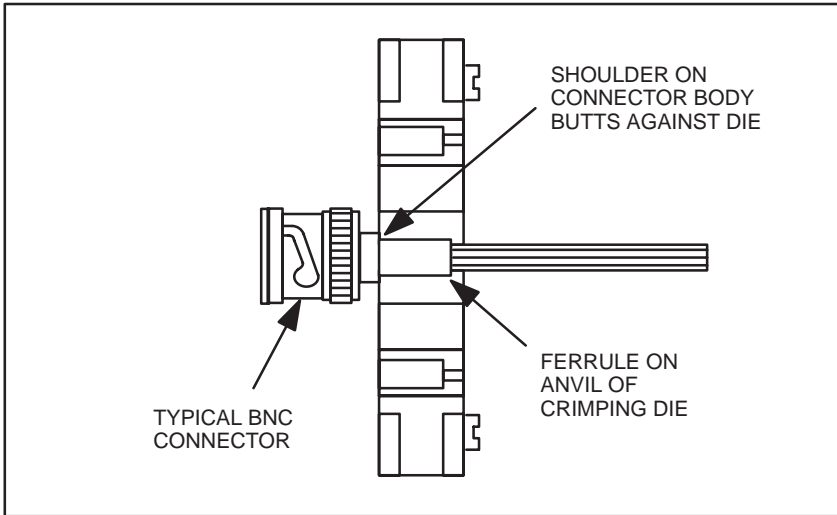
Connector Installation Step 9 for RG-59/U Cable
